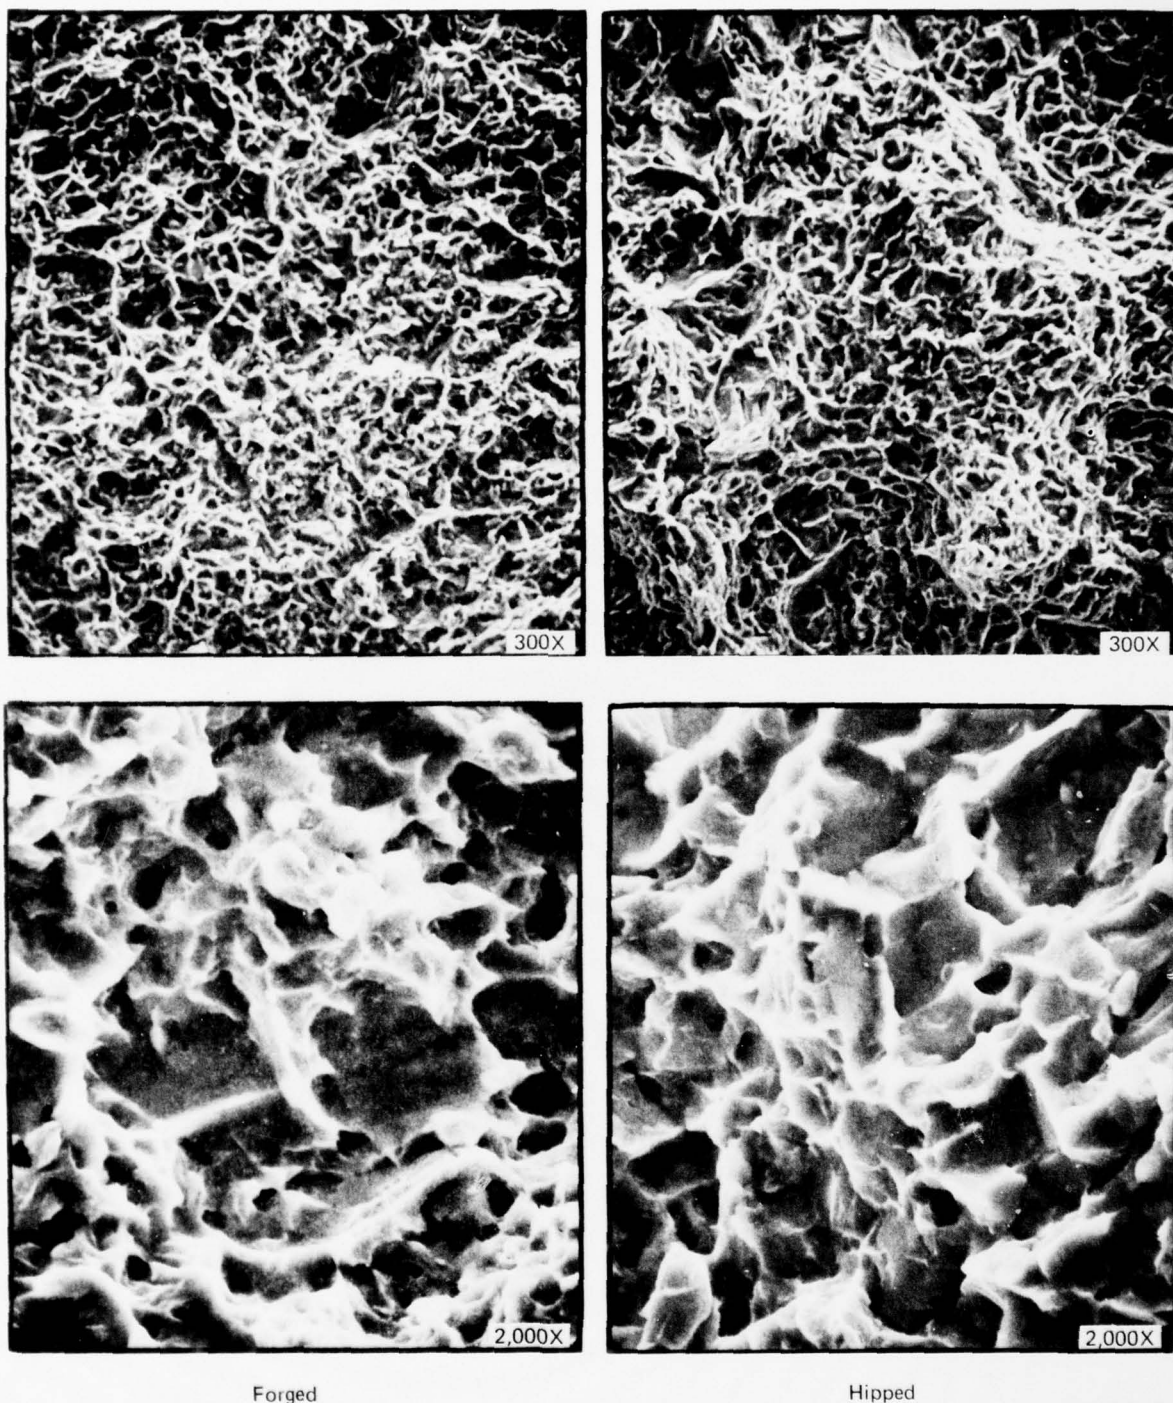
Fracture appearance at intermediate location in a compact tension specimen of (a) forged and (b) HIPed Ti-6Al-4V showing dimples of varying size and depth.
